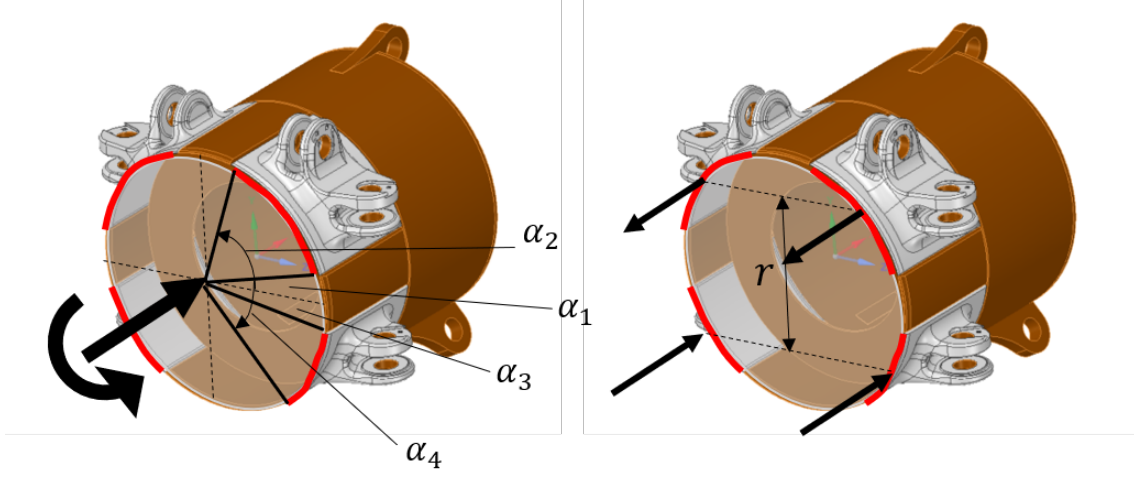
Cross-section at the critical location of the welds. The welds are indicated with red lines.
